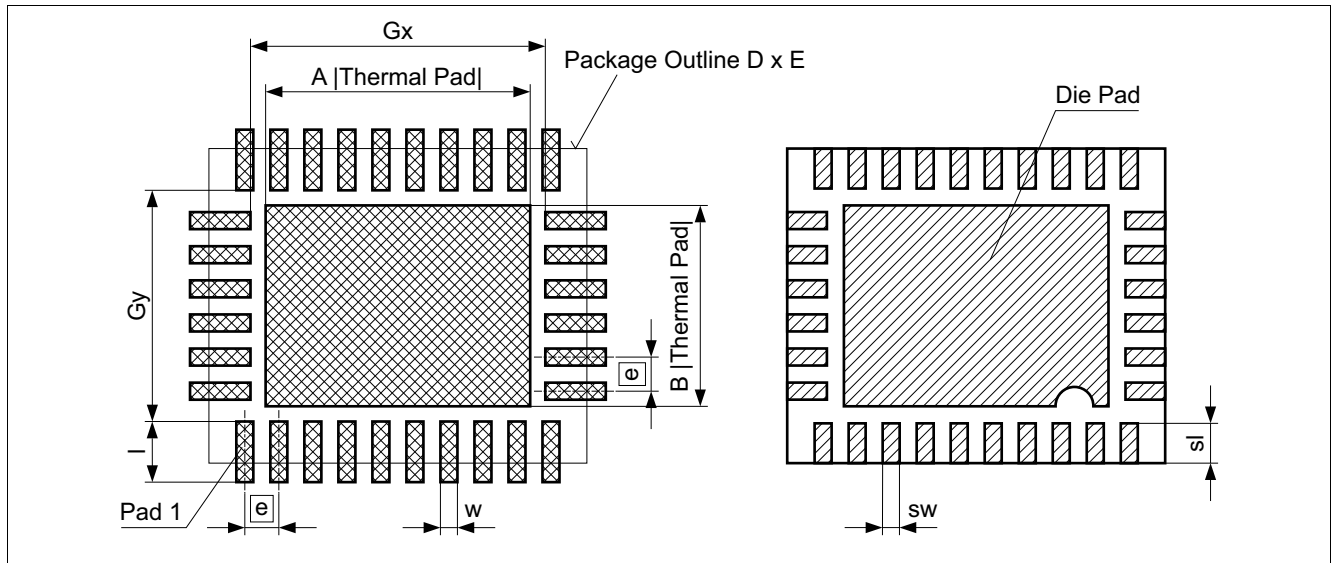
Schematic Drawing of PCB Pad Design Recommendation (left side) and Package Bottom View (right side)
